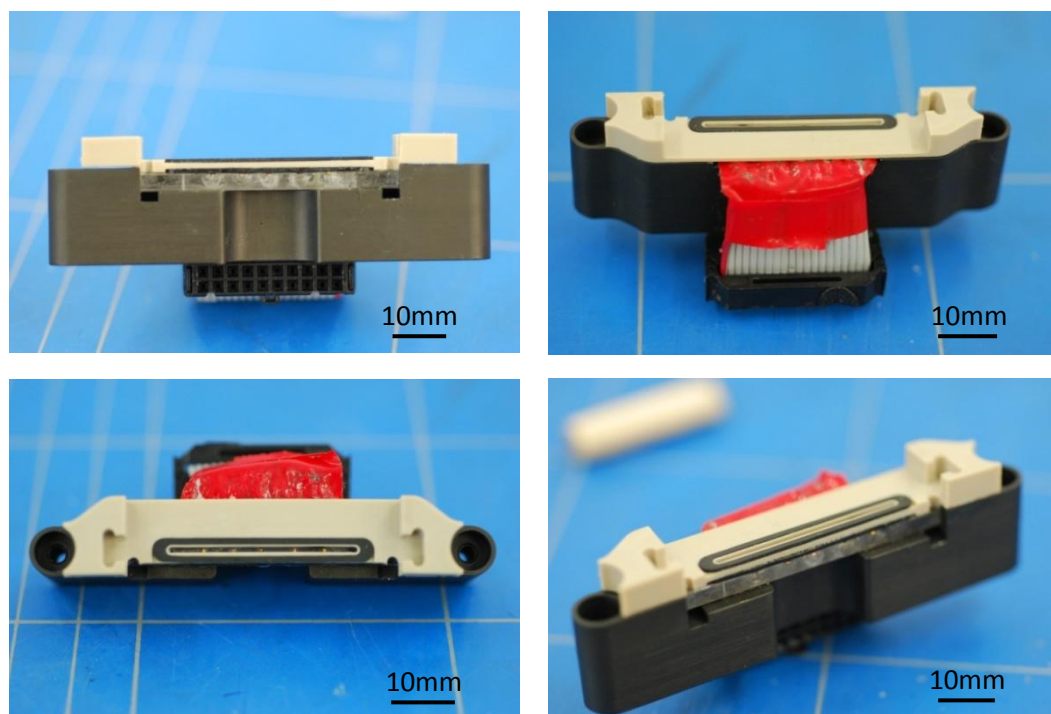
Different views of the completed gold electrode array and chip holder base with fixed connector.
